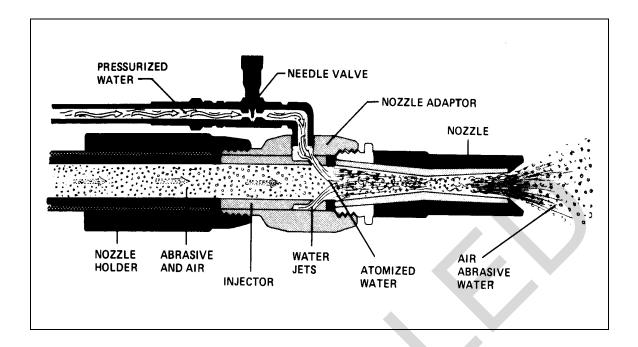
Schematic Drawing of Cross Section of Typical Water-Injected Wet Abrasive Blasting Nozzle
